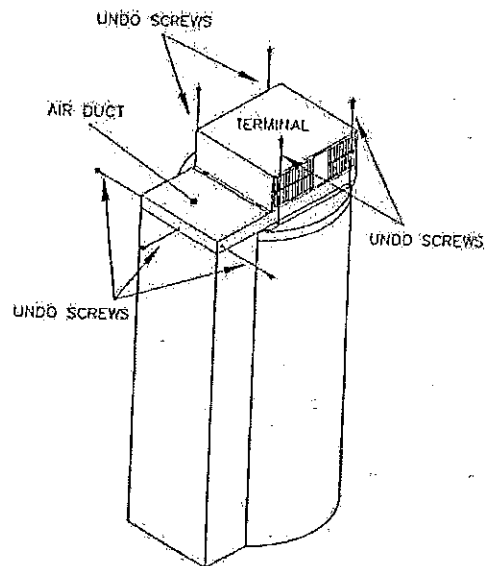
Removing the Flue Terminal & Air Duct Assembly
